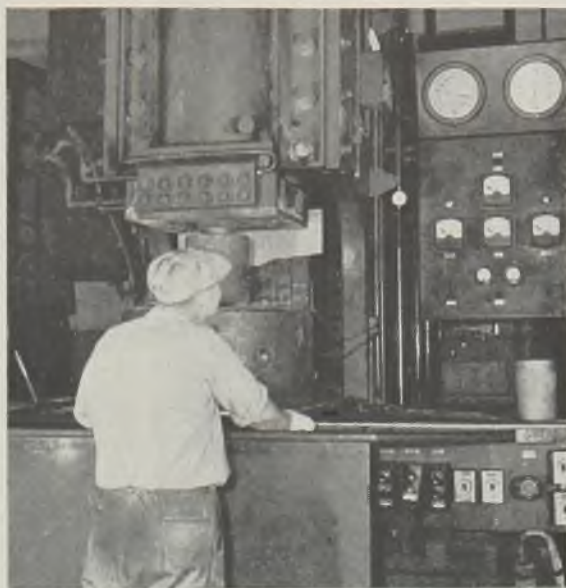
This 100-ton press-welder can turn out cemented carbide dies and other parts with cross sections as large as 100 inches
